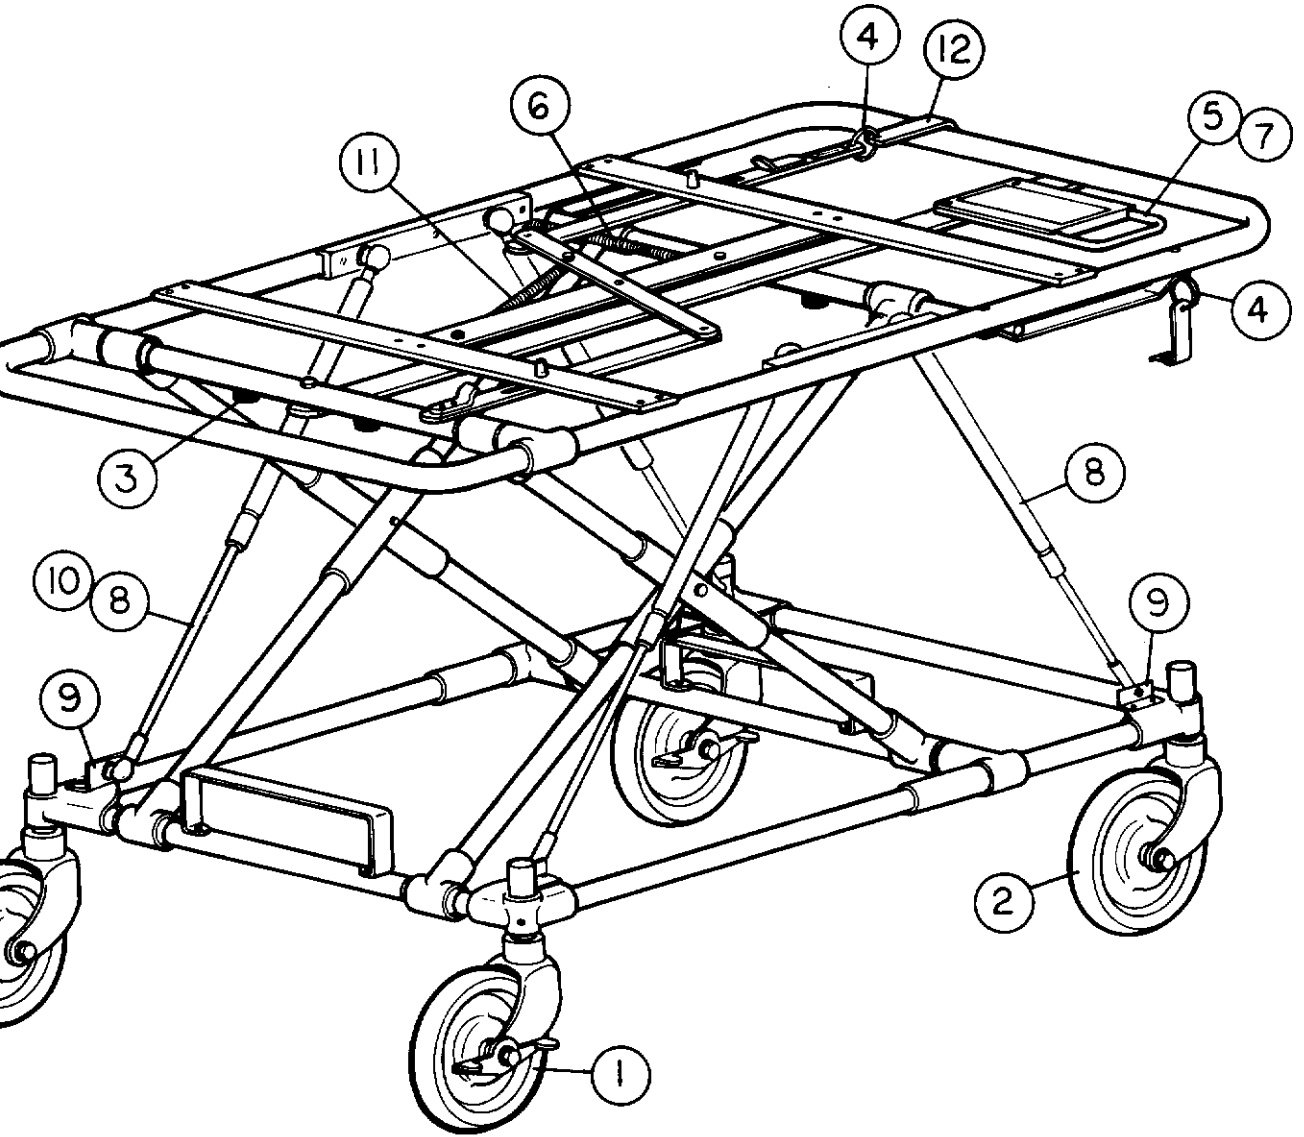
PARTS LOCATION DIAGRAM, ADJUSTABLE STAND ASSEMBLY
